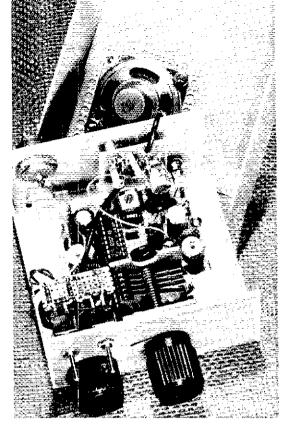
Interior view of the assembled tester. The case is made from sections of PC board that are soldered together.
